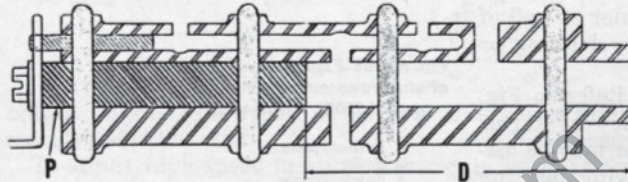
Plug (P) in pump bore must be 2.011-2.016 (D) from end of pump bore as shown above.
